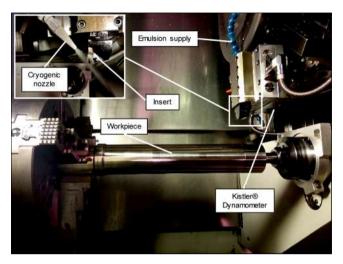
Experimental set-up: workpiece, dynamometer and shank tool with internal emulsion supply and cryogenic nozzle.
